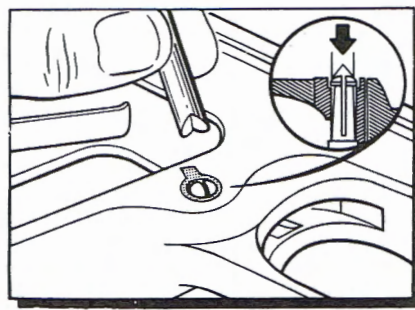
The firing pin and the magazine catch are retained by split pins. These split pins (HH) and (W) can be removed with the aid of the tool shown. This tool forces the pin to close up so that it may be pushed out easily. If an attempt is made to drive the pins out with a flat-end punch, they may be broken or badly deformed.
